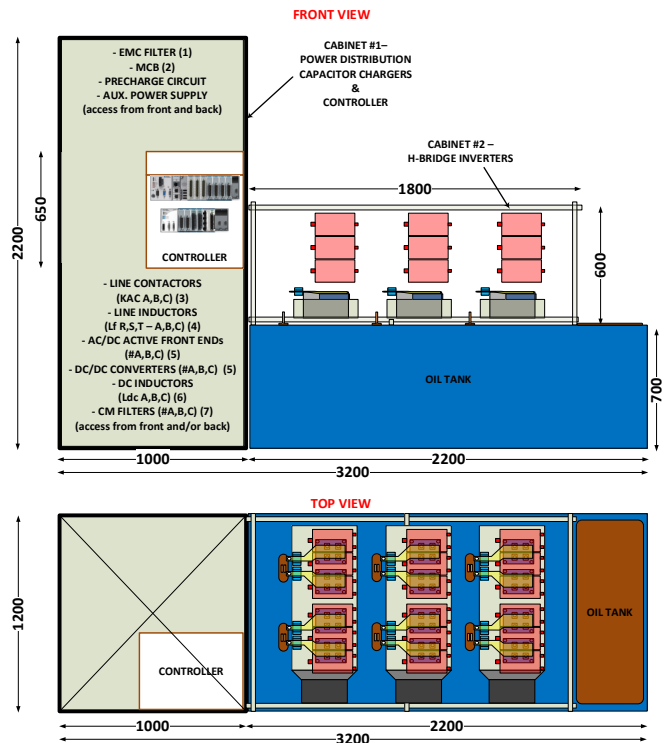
SML Modulator mechanical layout for reduced scale prototype rated 115kV/20A ; 3.5ms/14Hz (dimensions are in mm)
